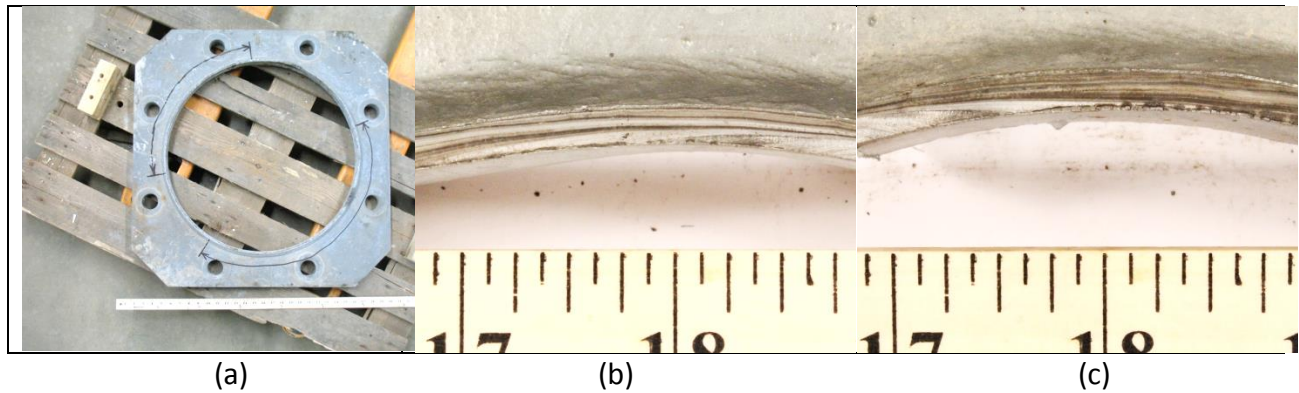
(a) Location and partial extent of the shorter (right) and longer (left) fatigue fractures in the pole shaft; (b) the fatigue crack arrest marks for the longer fatigue crack and (c) the fatigue crack arrest marks for the shorter fatigue crack.
